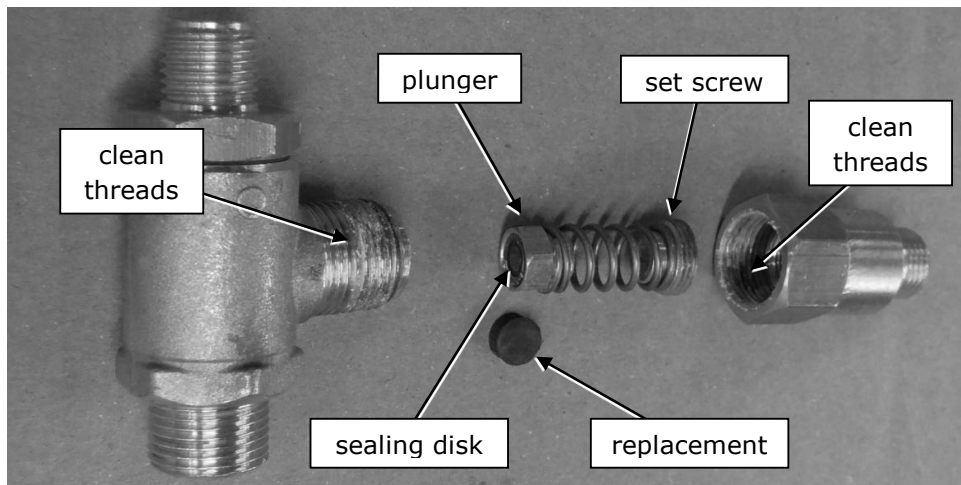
Exploded view of expansion valve showing plunger, spring set screw, and replacement sealing disk. There is no need to remove the expansion valve from the machine when replacing the disk.
